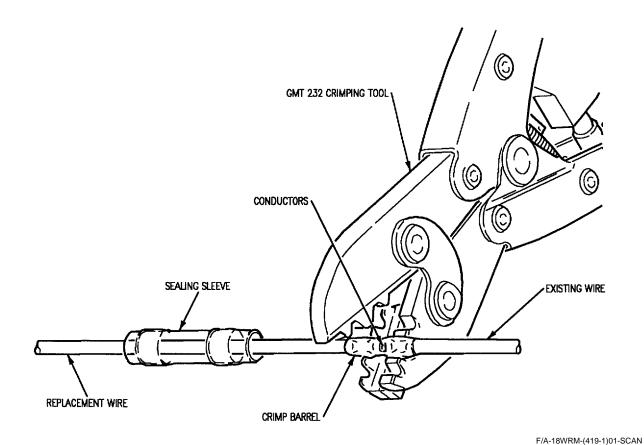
Crimp Tool Handle GMT232 Assembly and Use
